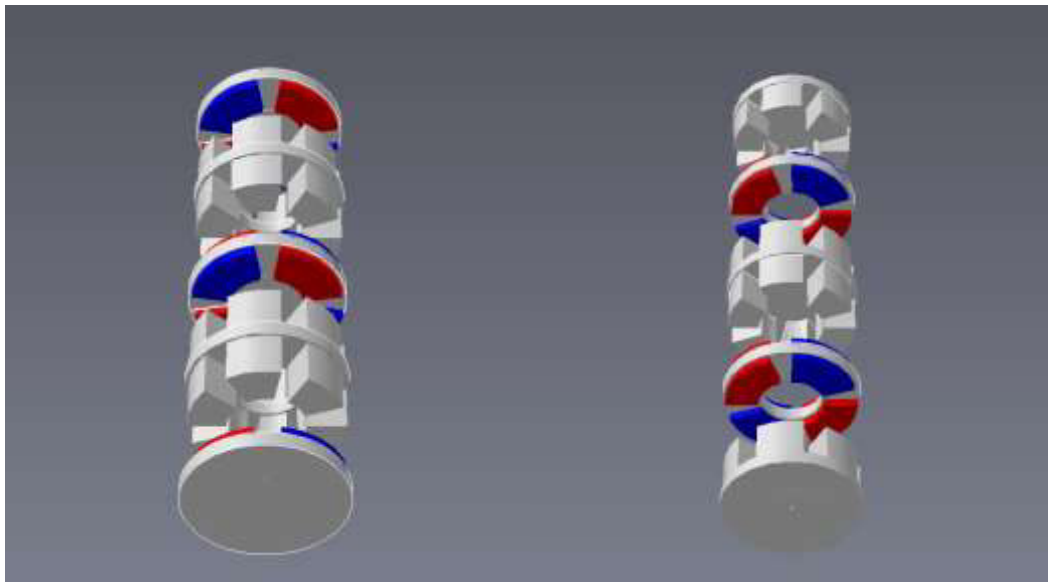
Multi-stacks machine: on the right there is a double stator, internal rotor machine with homopolar configuration; on the left is presented a double rotor, internal stator machine with heteropolar configuration.
